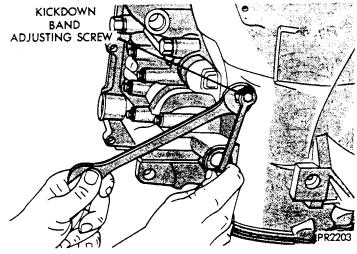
Loosen Lock Nut and Tighten Kickdown Band Adjusting Screw
